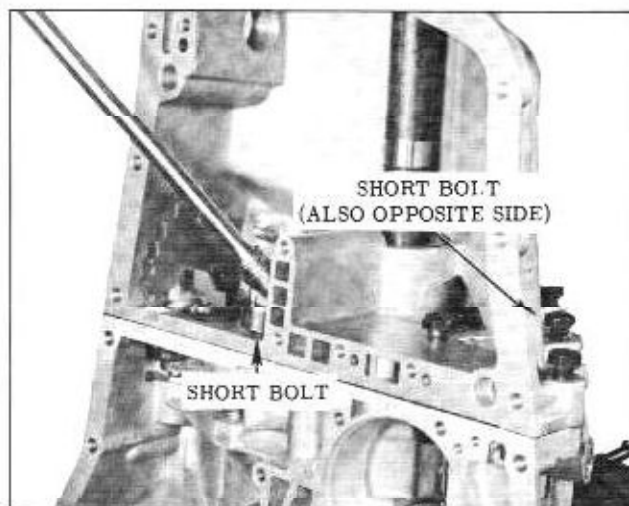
Rear Bearing Retainer Attaching Bolts
